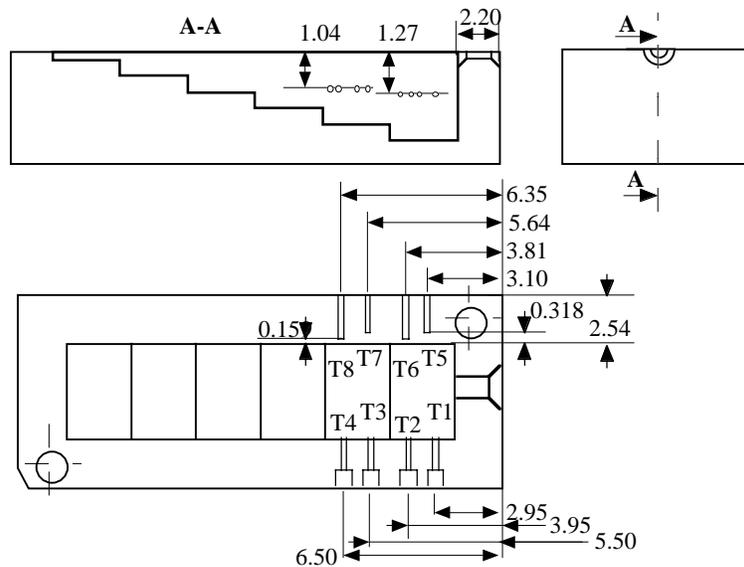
Bottom die showing thermocouple placement (dimensions in cm). Thermocouple index is also shown.
